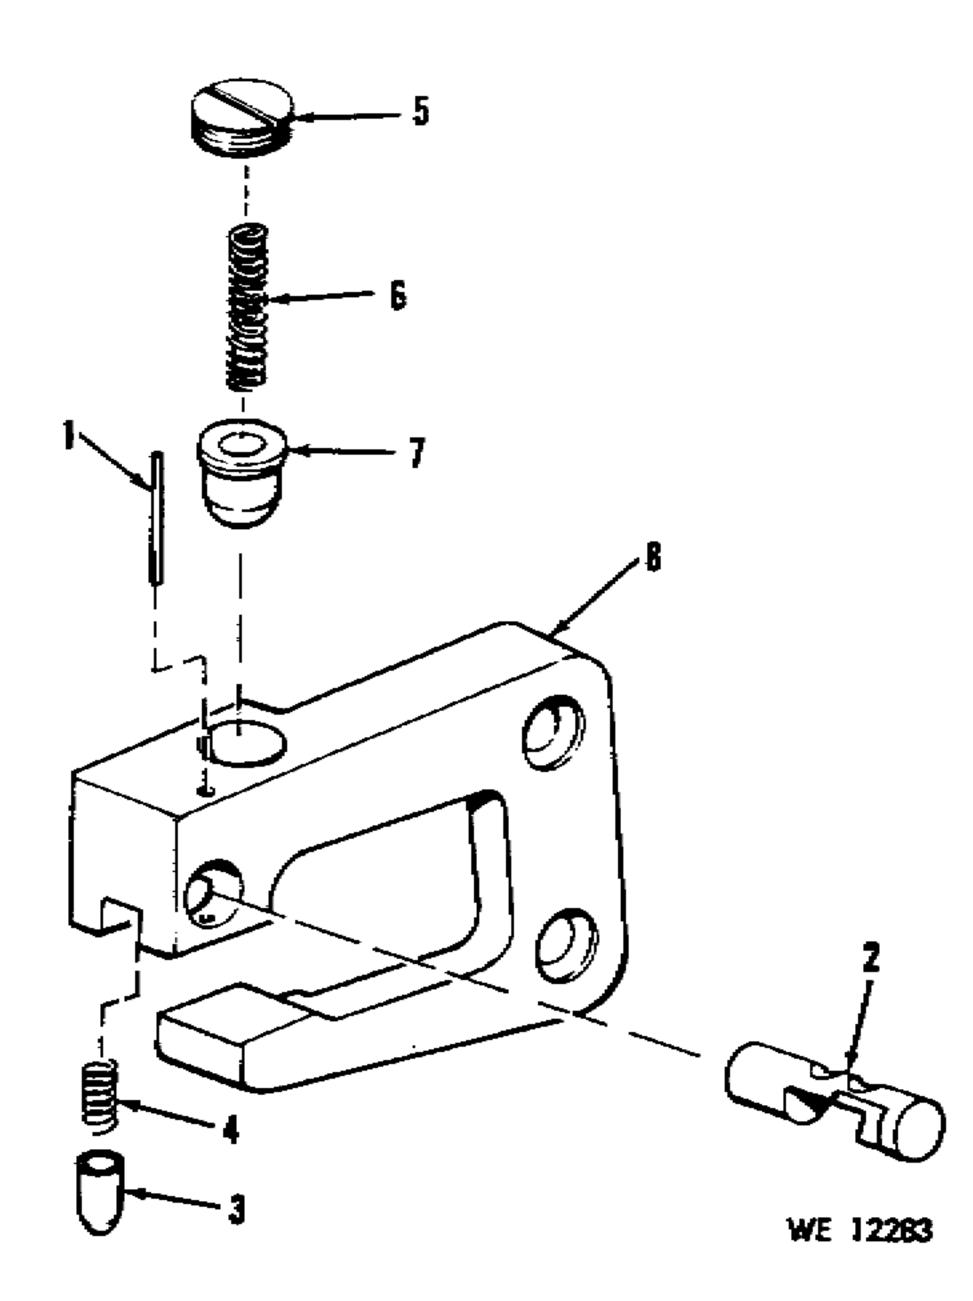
Retracting bar group for Caliber .30 Machine Gun, M37 only—exploded view.
